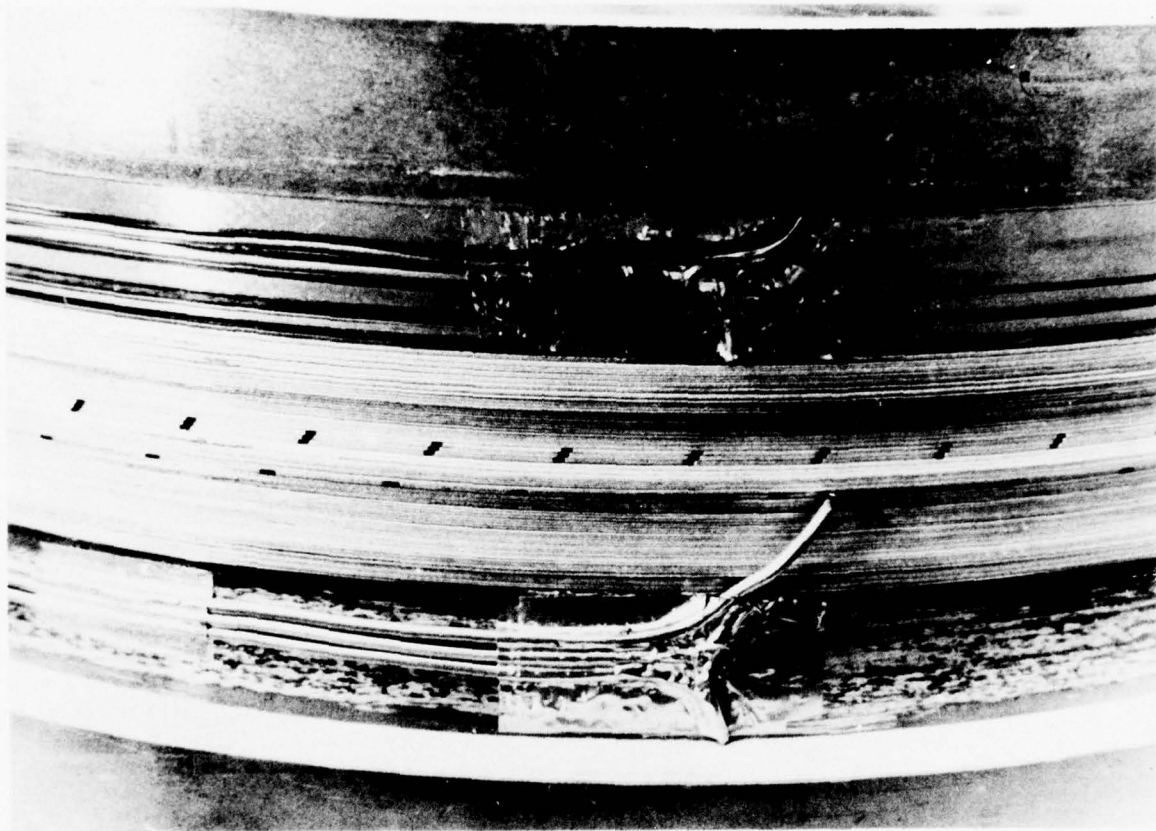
Sequentially Assembled Wheel Blank Laminates on the Bond Fixture with the Thermocouples Installed.
